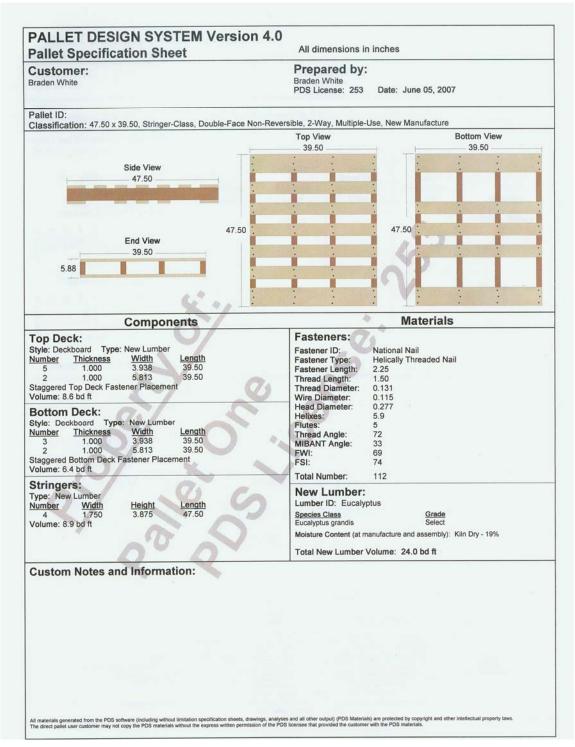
Heavy duty 4 stringer pallet design details (used with permission of PalletOne).
